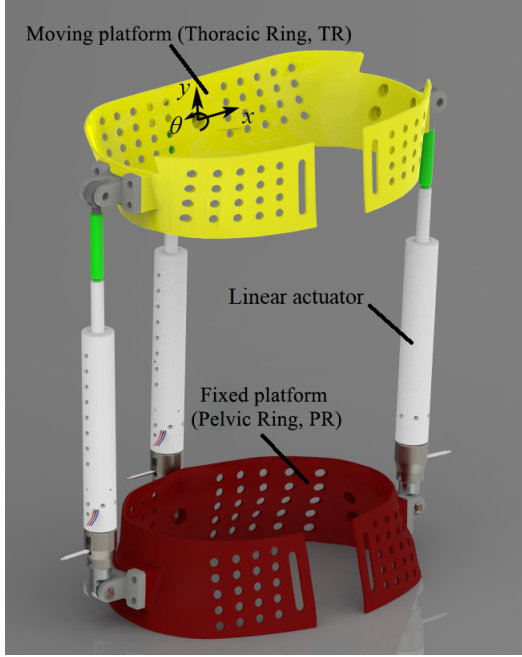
Robotic Lumbar Spine. Robotic lumbar brace consists of moving platform (TR), fixed platform (PR), three linear actuators and other components.
